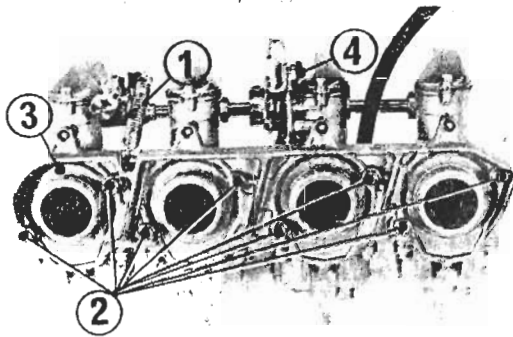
(1) Throttle return spring (2) Screw (3) Stay plate (4) Accelerator pump spring
